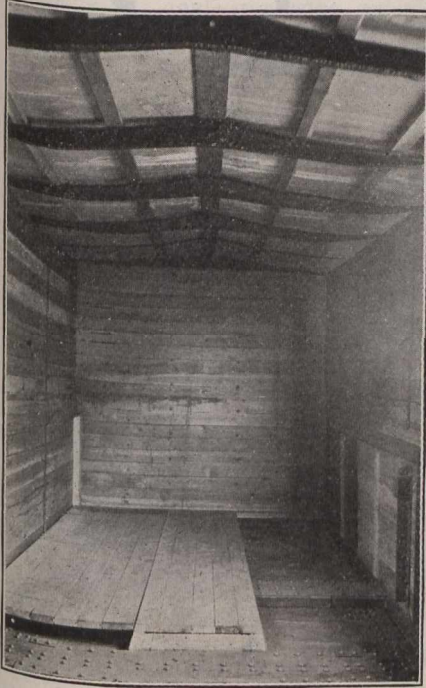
Interior View of Car with Convertible Door on One Side Open.
